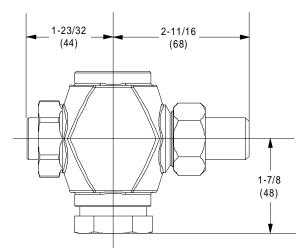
1/2 in. Normally Open Union Angle VG7000 Series Bronze Control Valve Dimensions, in. (mm)
